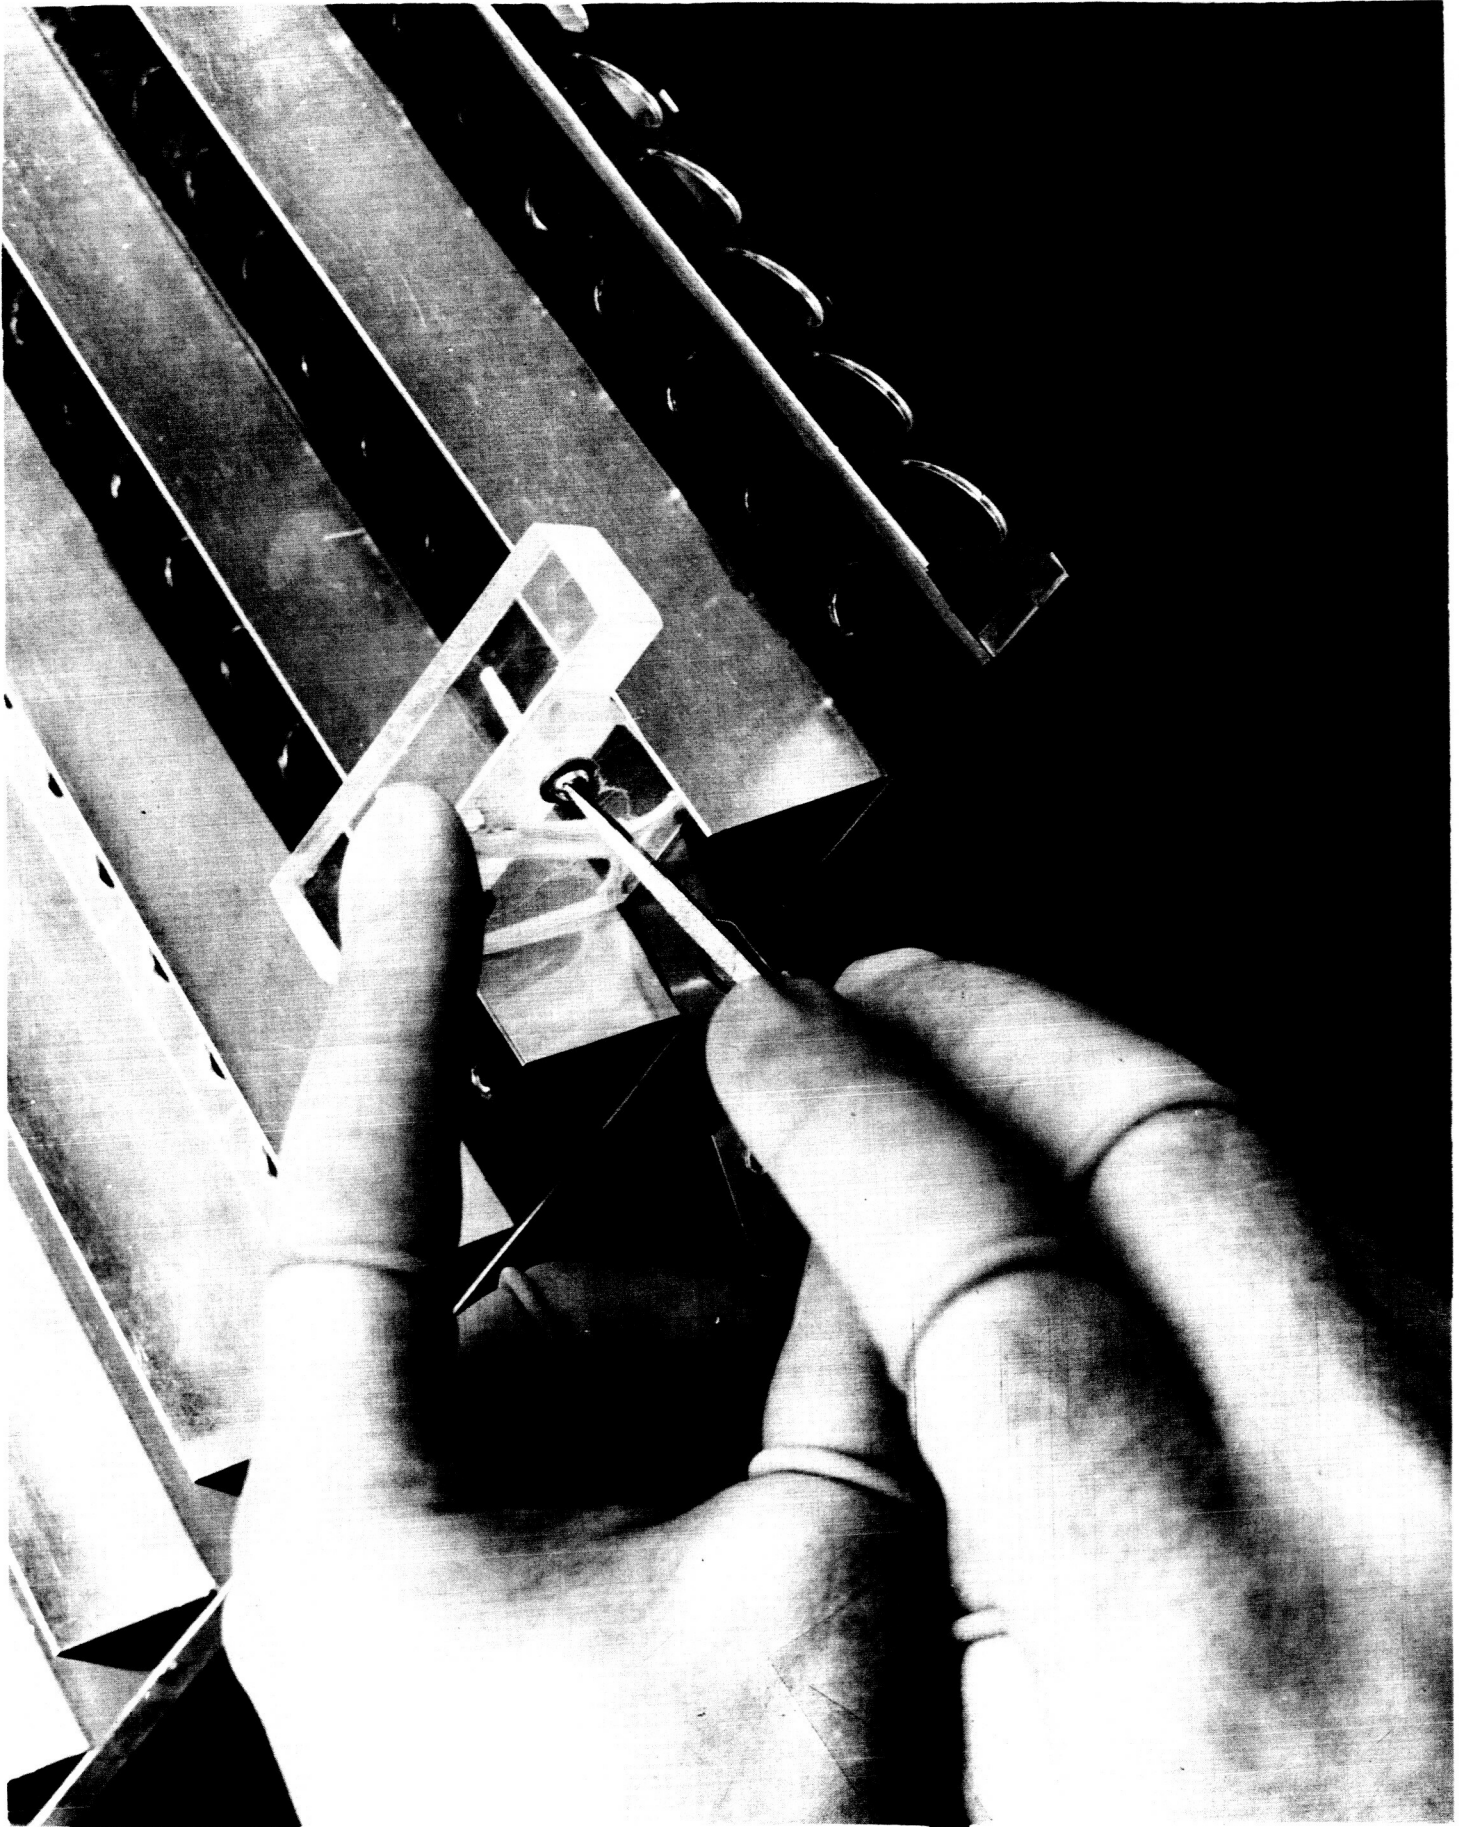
ADJUSTING APPLICATOR TO LAY A 5 MIL
